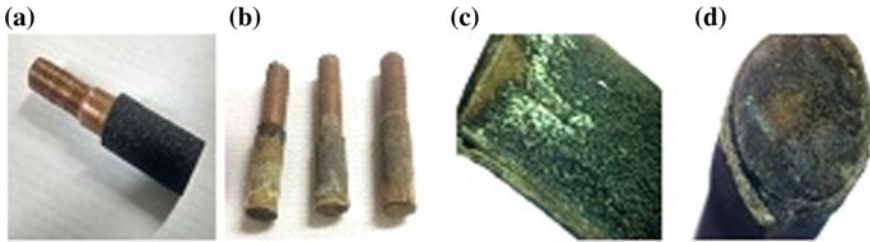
Surface of the ACT before machining (a) and after machining (b, c, d)
